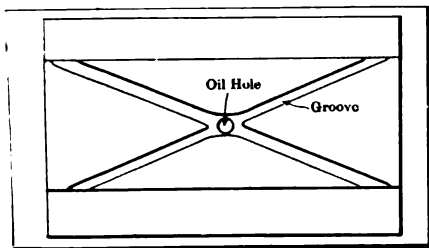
Showing method of cutting oil grooves in connecting rod brass, grooves and oil hole being indicated
